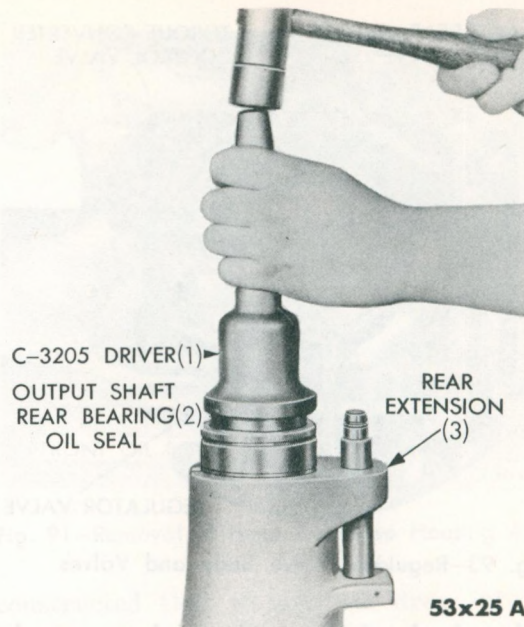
Installing Output Shaft Rear Bearing Oil Seal
